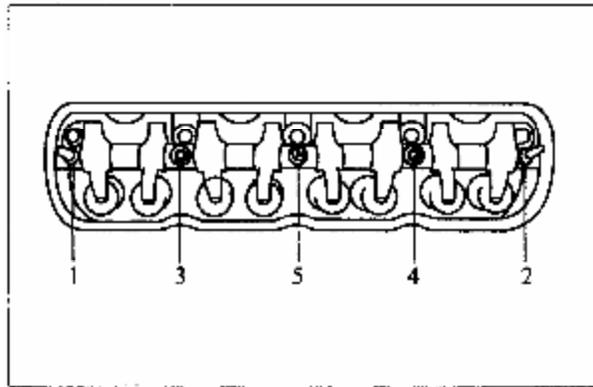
Sequence for Disassembly of Rocker Arm Bolts
